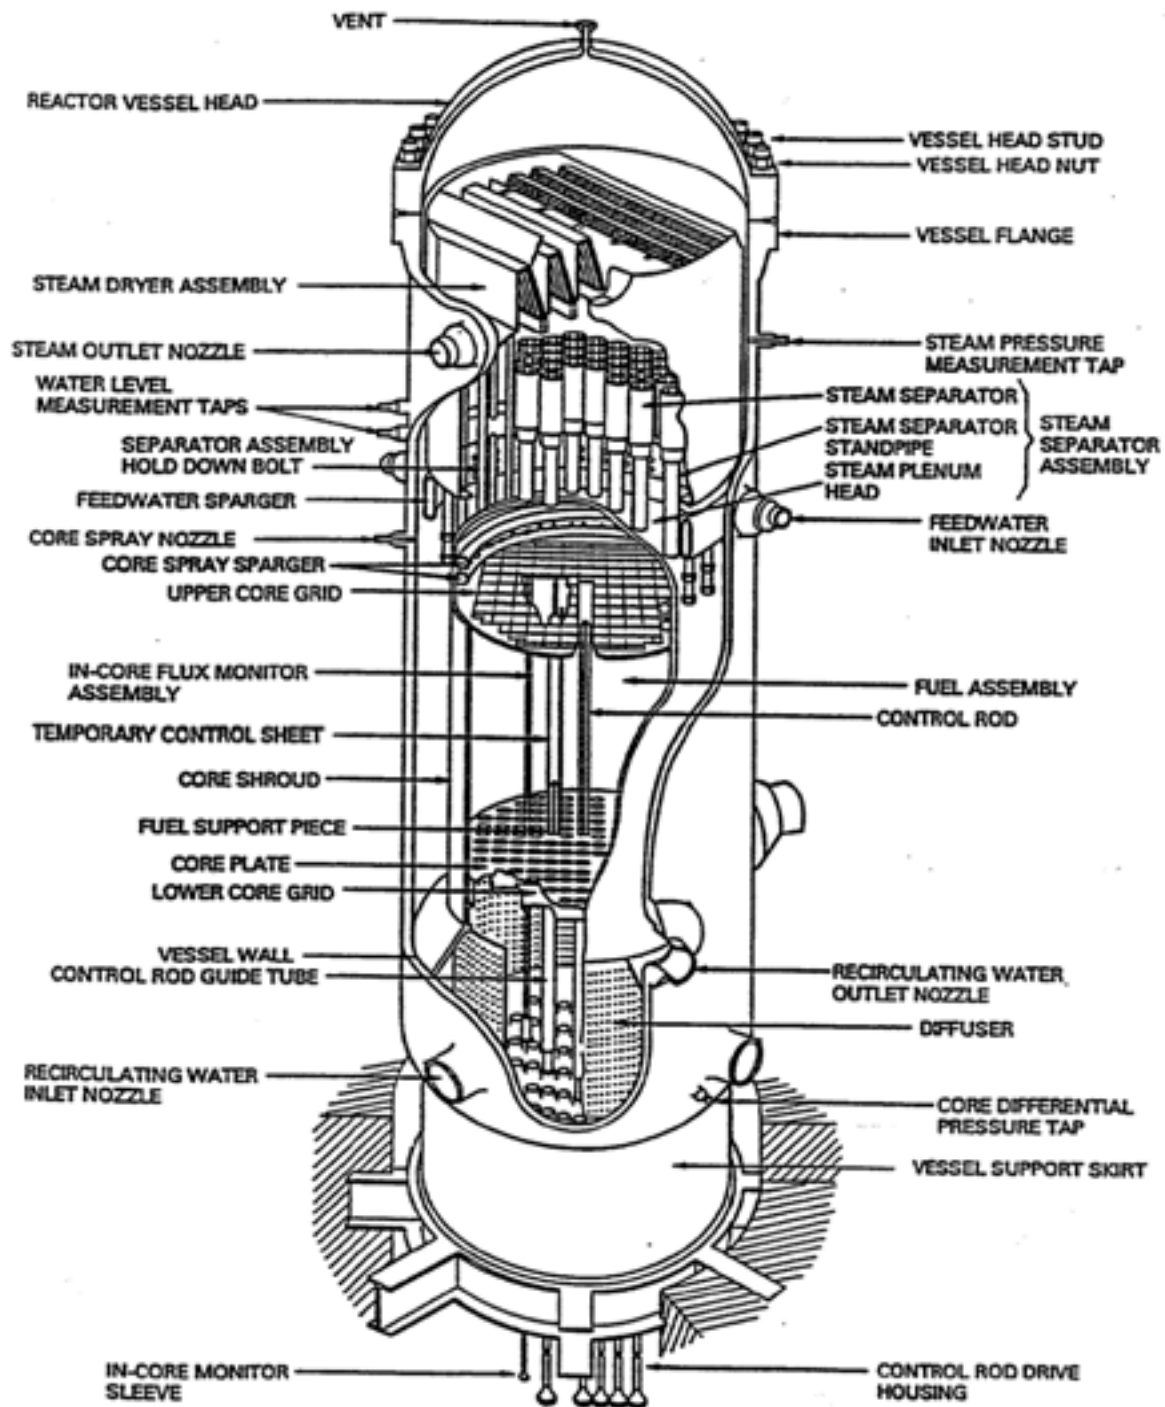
(b). Reactor assembly for GE BWR/6 jet pump plant.
